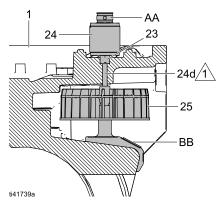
Fan and Motor Assembly with Fan Press Tool
